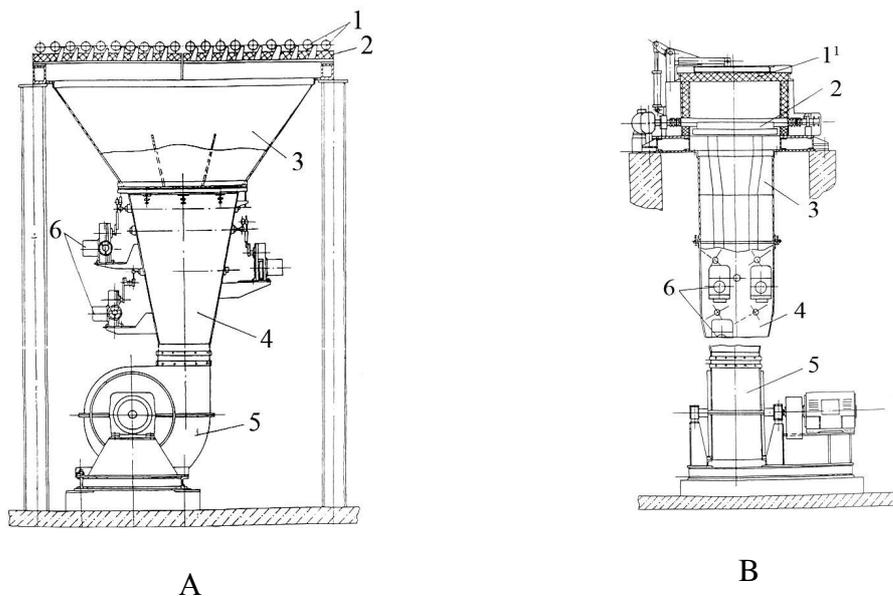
Schematic presentation of HJCU in the conditions of JSC "MMZ" with air supply to the roller conveyor of Stelmor line by means of adjustable device: A – longitudinal section; B – cross-section; 1 – roller conveyor; 1¹ – heat insulation cover; 2 – nozzle channels; 3 – pressure box; 4 – output control device; 5 – blowing fan; 6 – actuator
